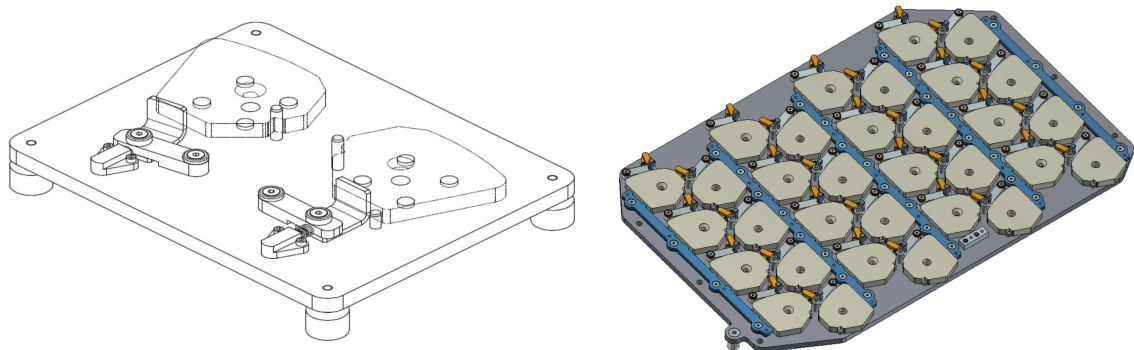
(a) Templet used for the placement of the pieces; (b) New clamping device for measuring parts
